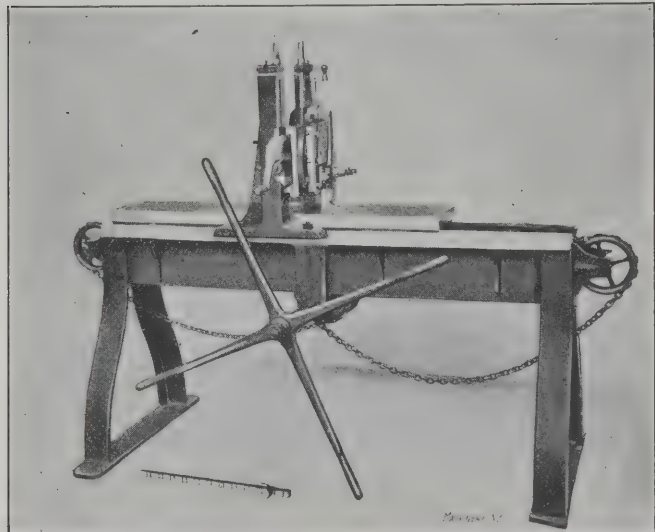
Roberts Planing Machine, Table 52 inches Long by 11 inches Wide (1817), South Kensington Museum
